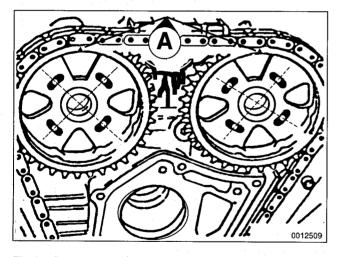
Camshaft sprockets correctly installed with arrows pointing up and bores centered to tapped holes (M44 engine).
